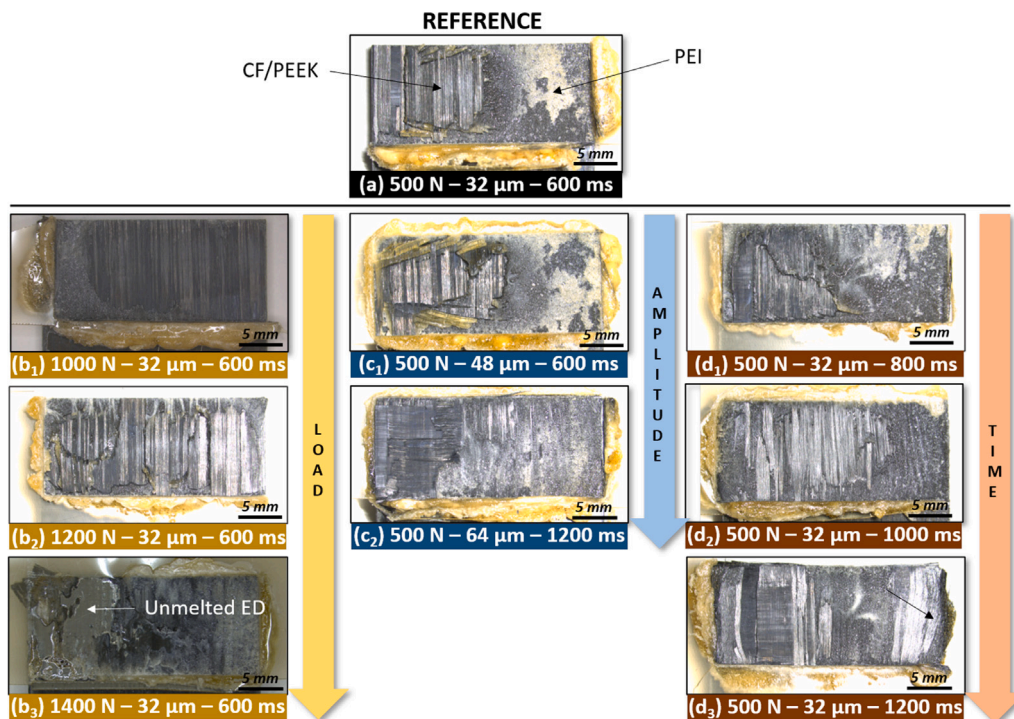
Interfacial fracture of welded specimens in several welding conditions.
